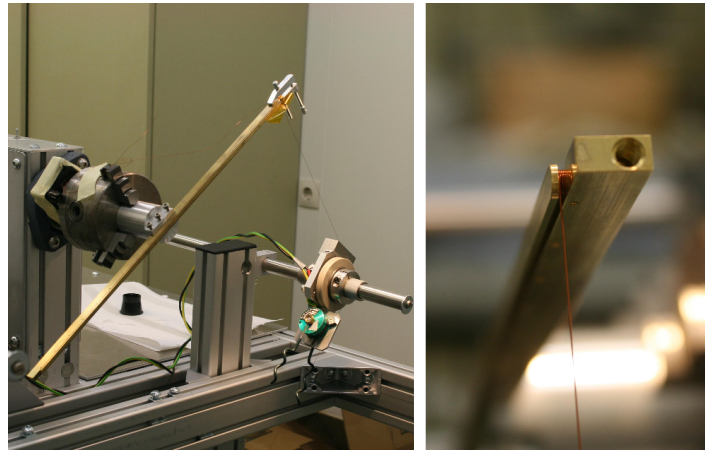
Winding of one correction coil: circular support holds the center of the correction coil former to the winding machine (left) and detail of the winding (right).
